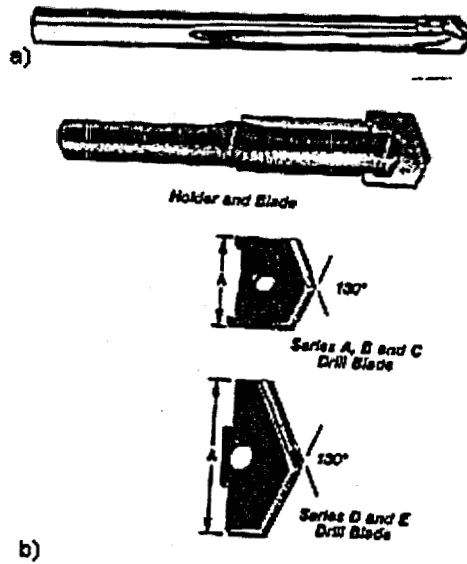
Drills with steel holder and WC/Co cutters
